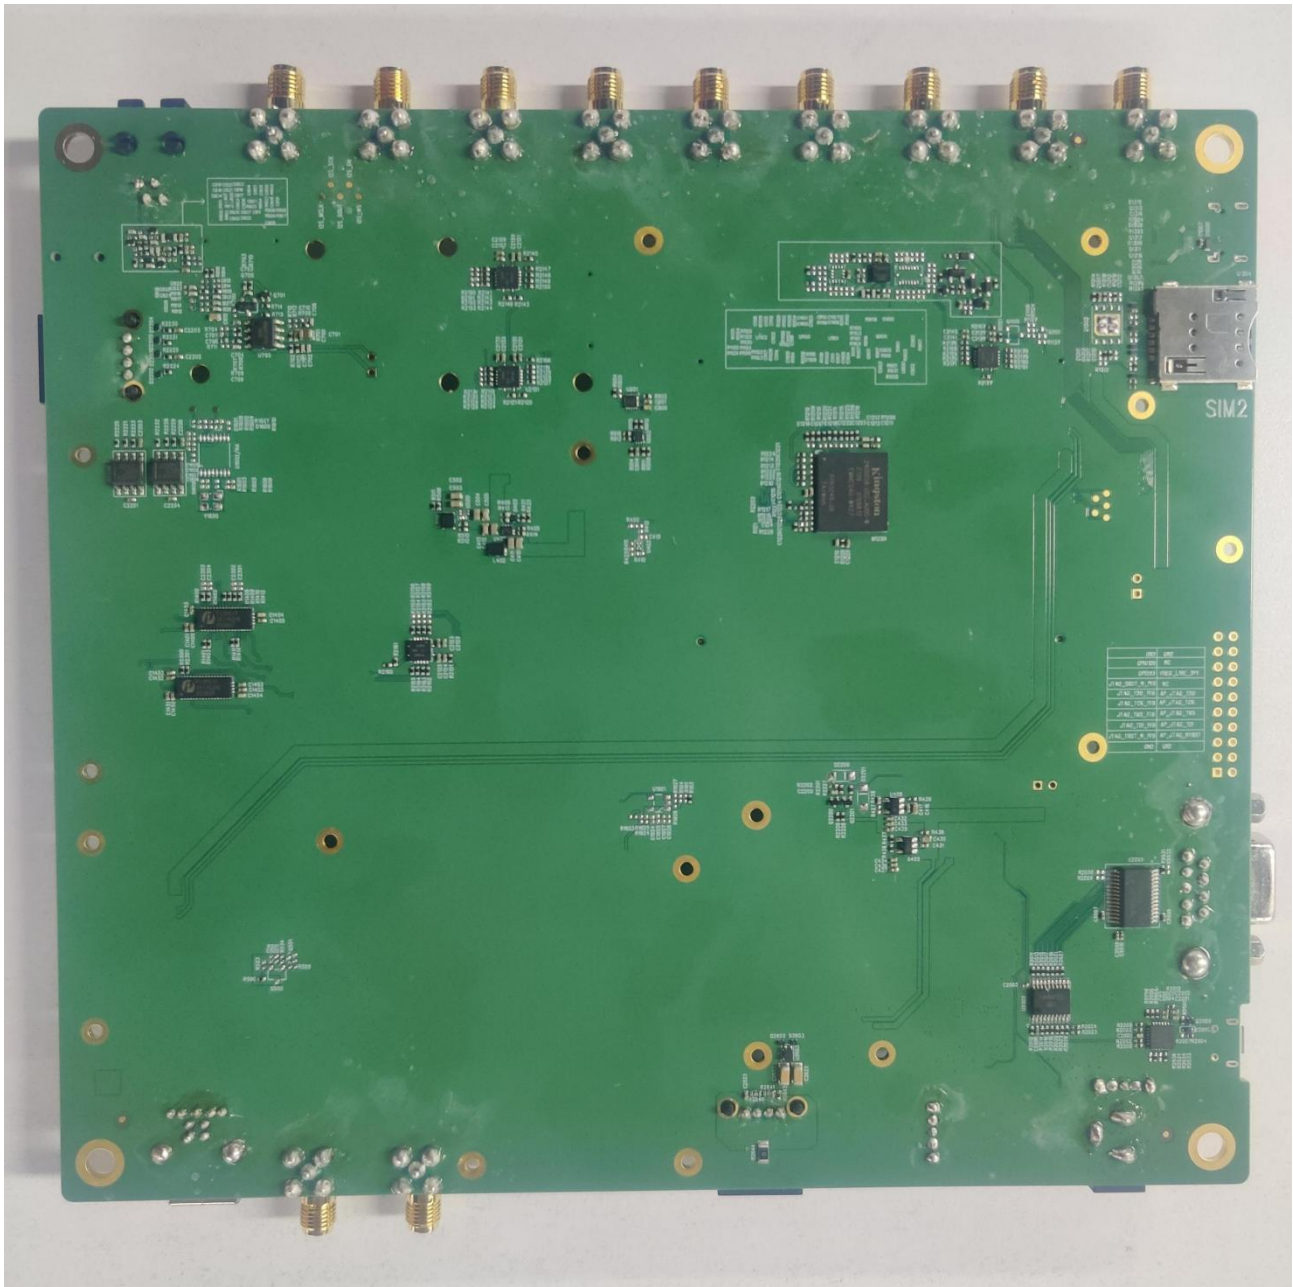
The bottom view of 8XQ000-5G+V2X-EVB\_V1.02
